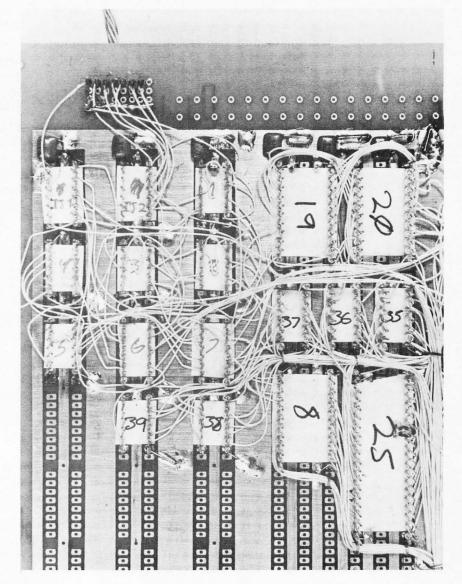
Detail illustrating wire wrapped assembly of figure 2 using a general purpose prototyping board.
